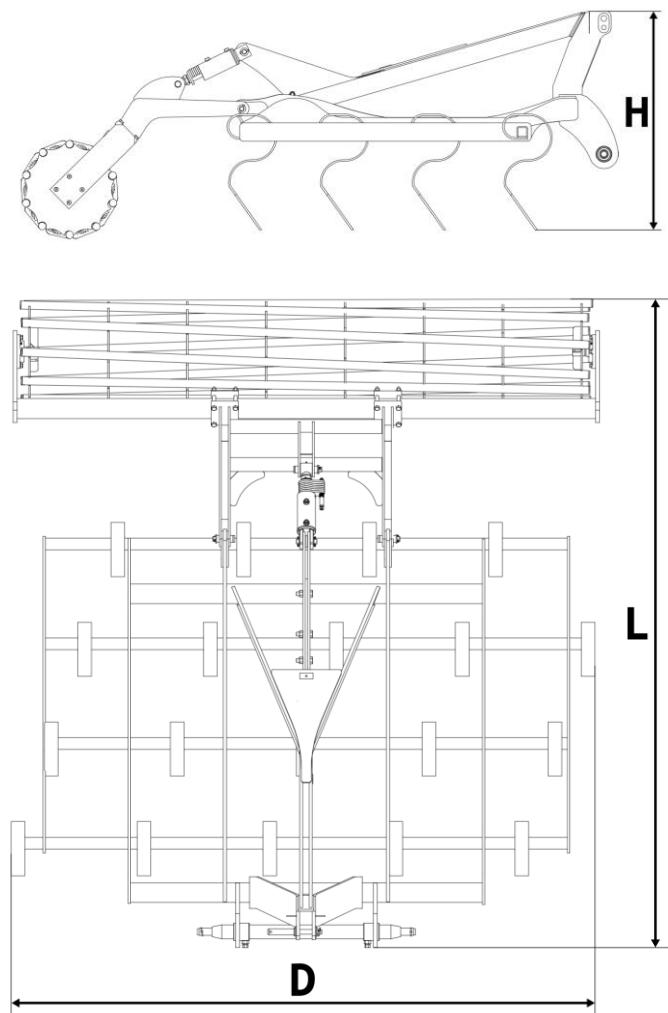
Transport dimensions of the cultivator SUPER 3,0m wide with tubular roller option (D - width, L - length, H - height) (see Table 3)
